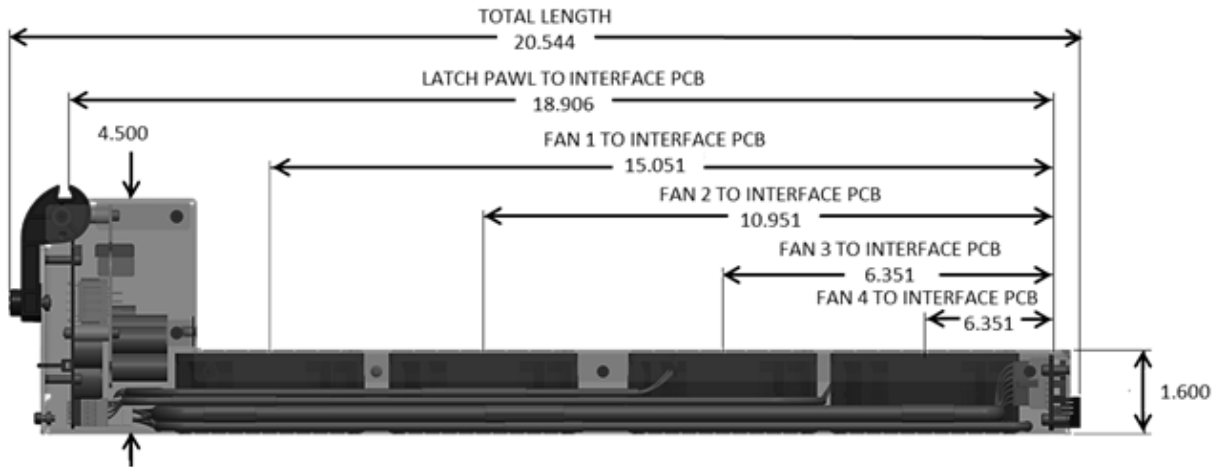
GEN1 Critical Dimensions (side) [inches]
